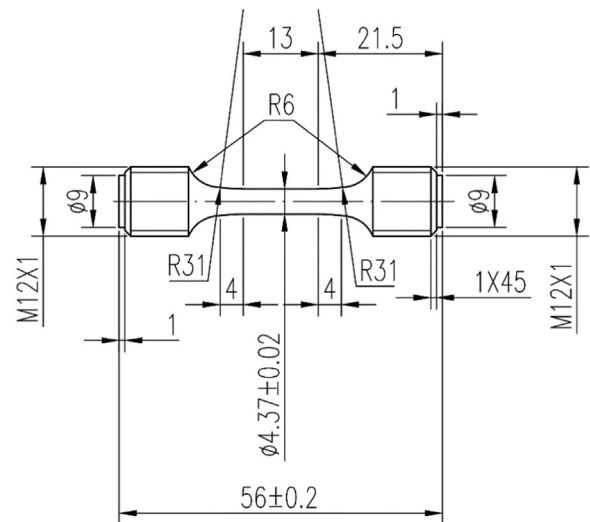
Geometry of specimens used for low-cycle fatigue tests (all dimensions in mm).
